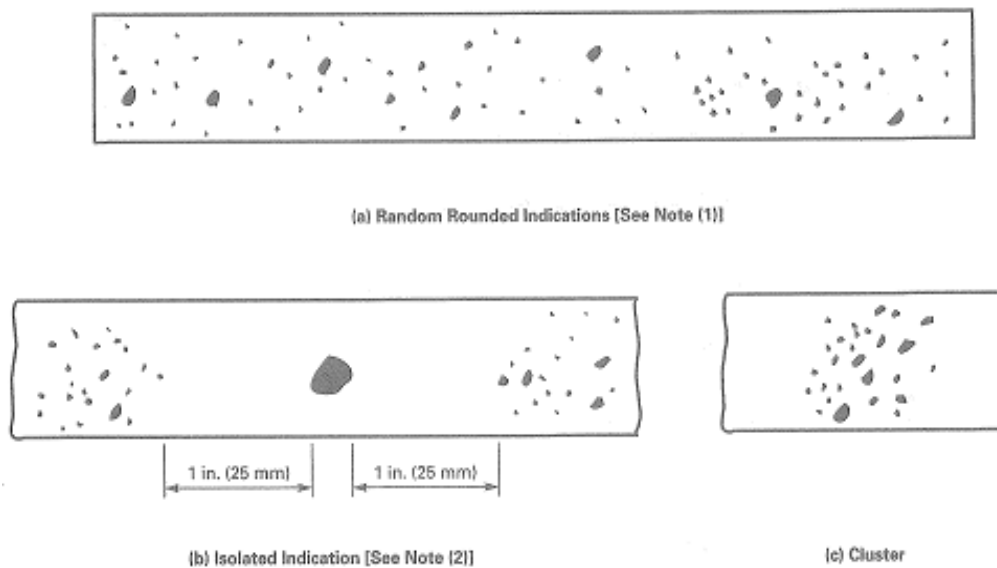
CHARTS FOR t OVER 2 in. to 4 in. (50 mm to 100 mm), INCLUSIVE
